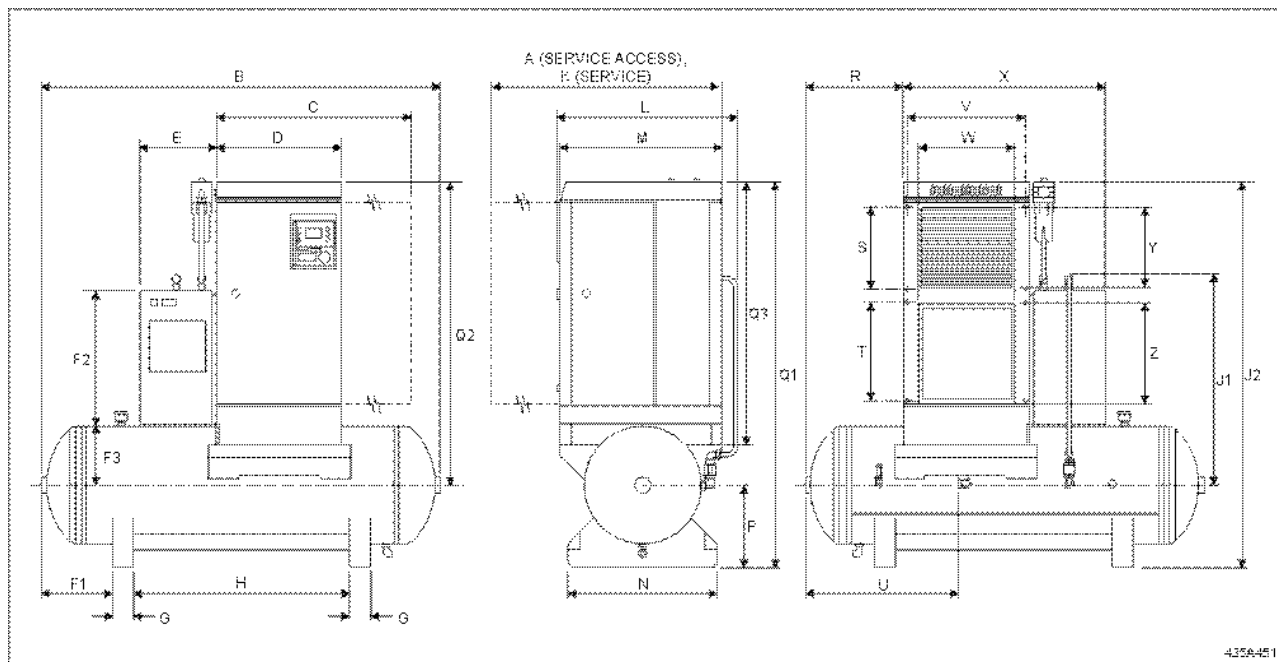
ACE HV04-HV07 Compressor and the Hypac Range Dimensions
